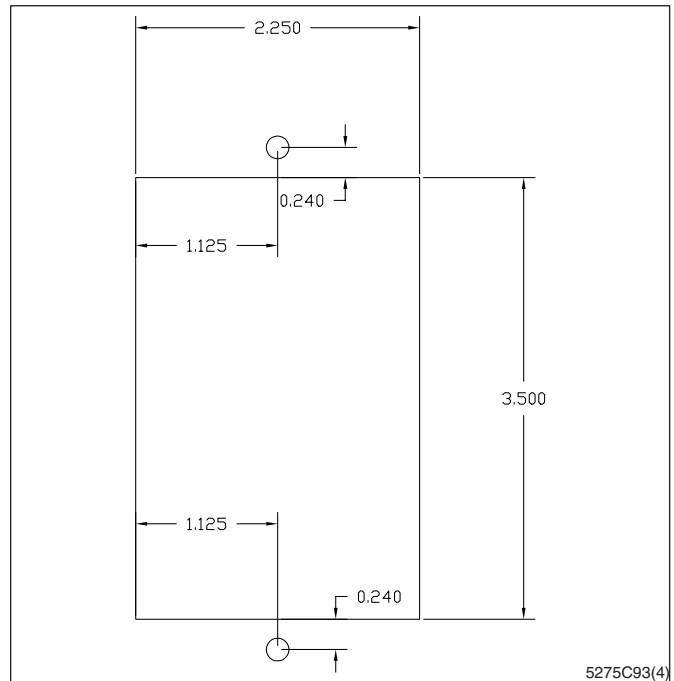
Panel Cutout Dimensions (dimensions in inches)
